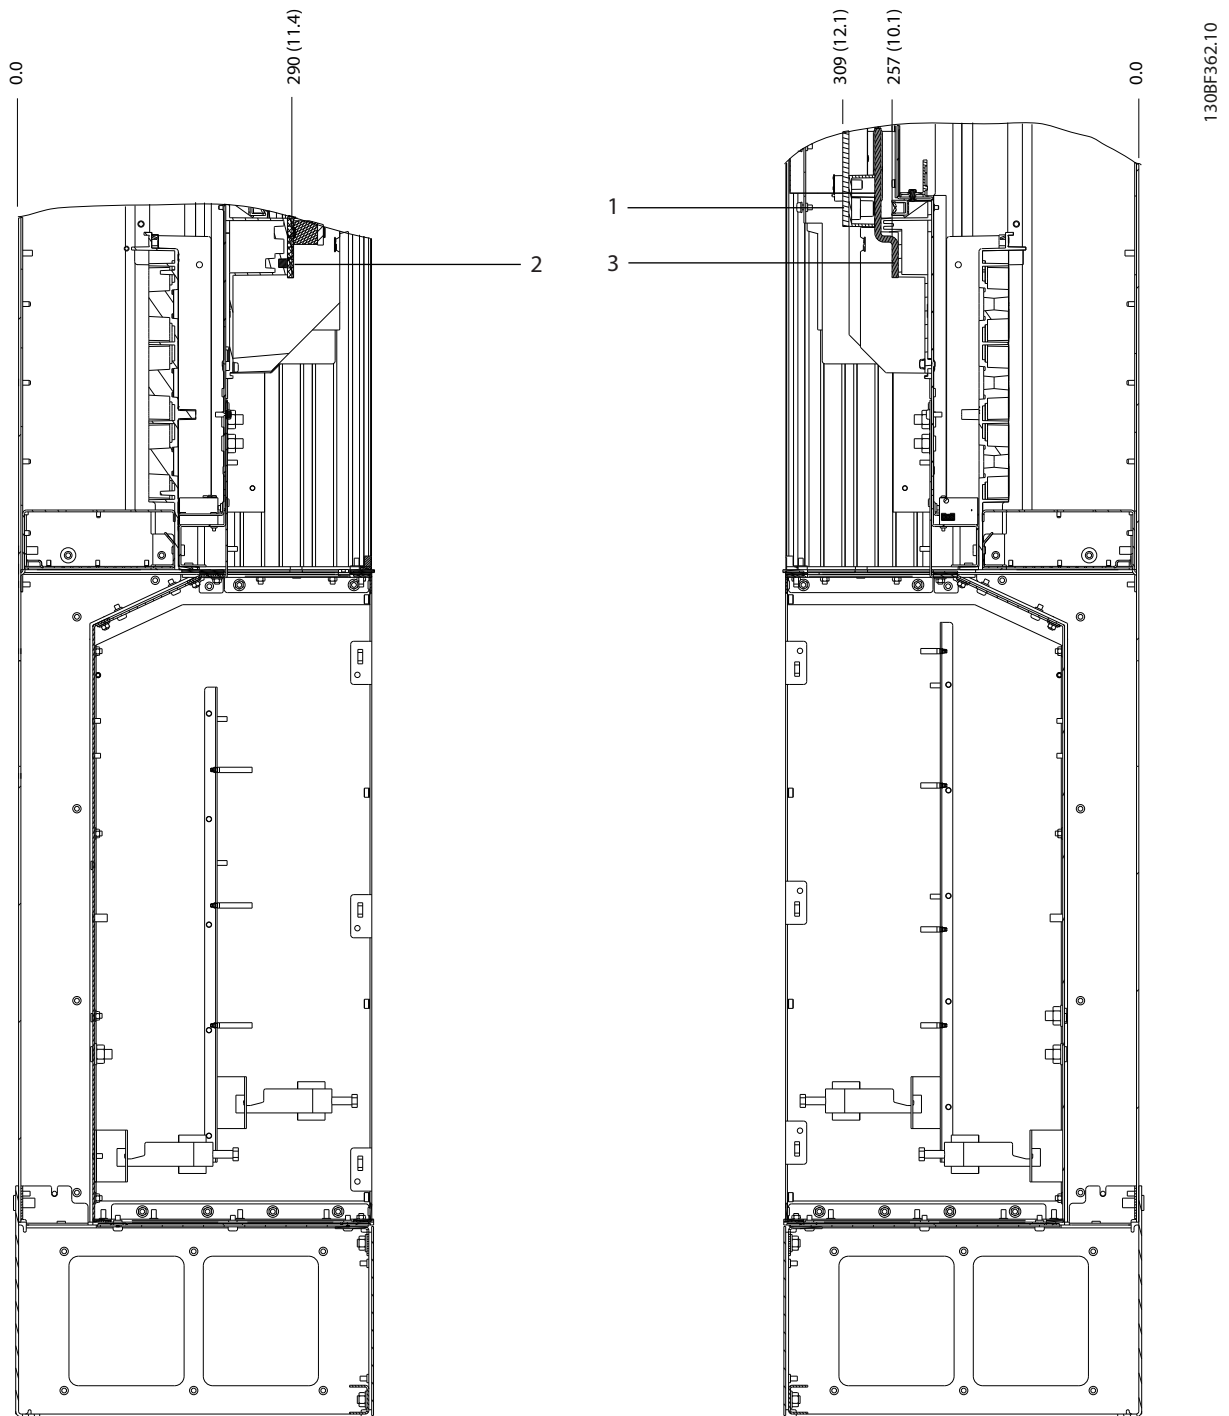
D7h Terminal Dimensions with Disconnect Option (Side Views)
